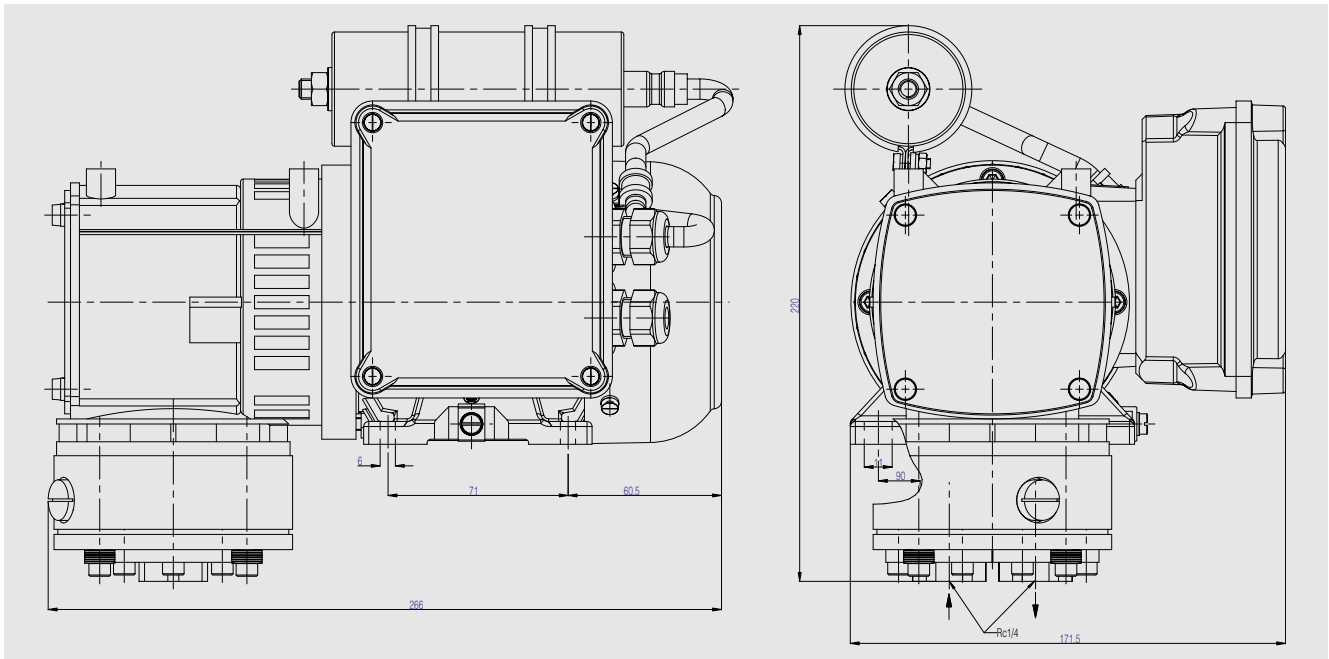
/11 Corrosion-resistant sample gas pump, explosion-proof version
